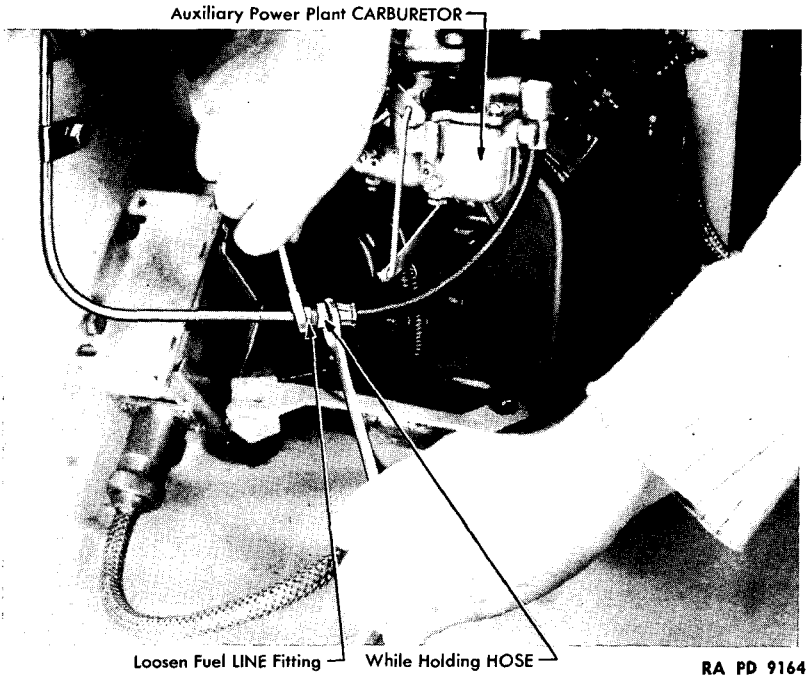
Removing Fuel Line — Auxiliary Power Plant
